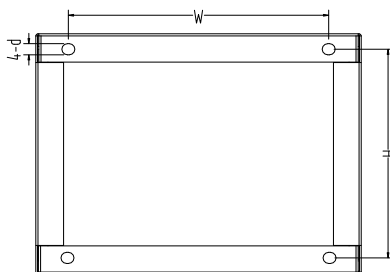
Installation Dimensions of Anchor Bolt of Base
